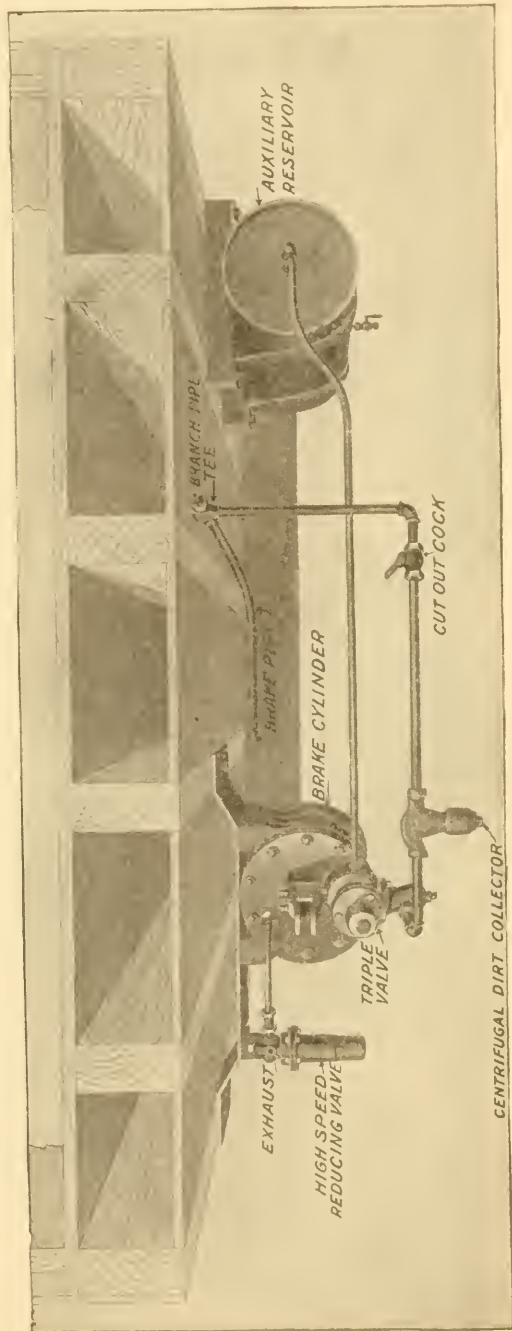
Westinghouse High-Speed Reducing Valve Applied to Car
